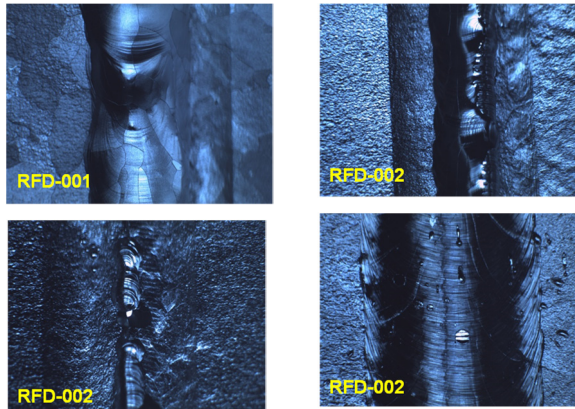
Weld under bead (top), incomplete welds (bottom left), and weld splatter (bottom right) of the final welds in the rf-dipole cavities.
